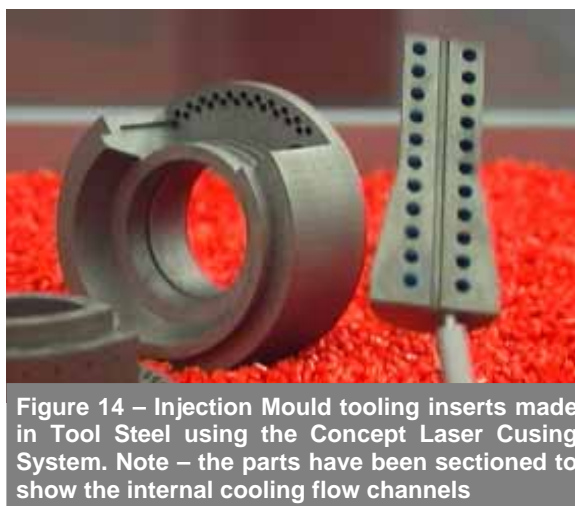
Injection Mould tooling inserts made in Tool Steel using the Concept Laser Cusing System. Note – the parts have been sectioned to show the internal cooling flow channels
